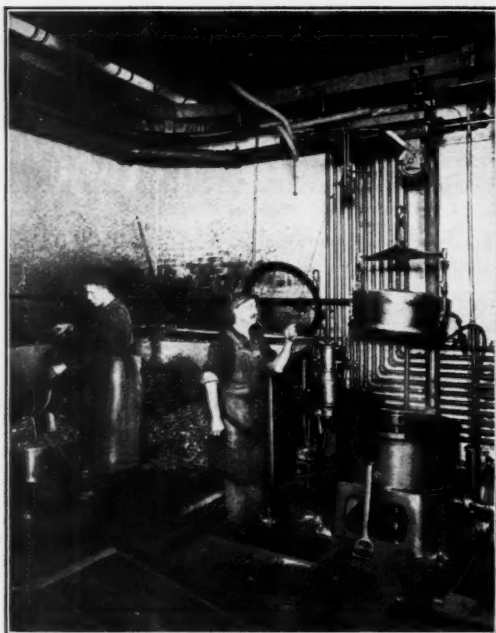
Steam Turbine Oil Separator used in New Process Gear Corporation Plant
